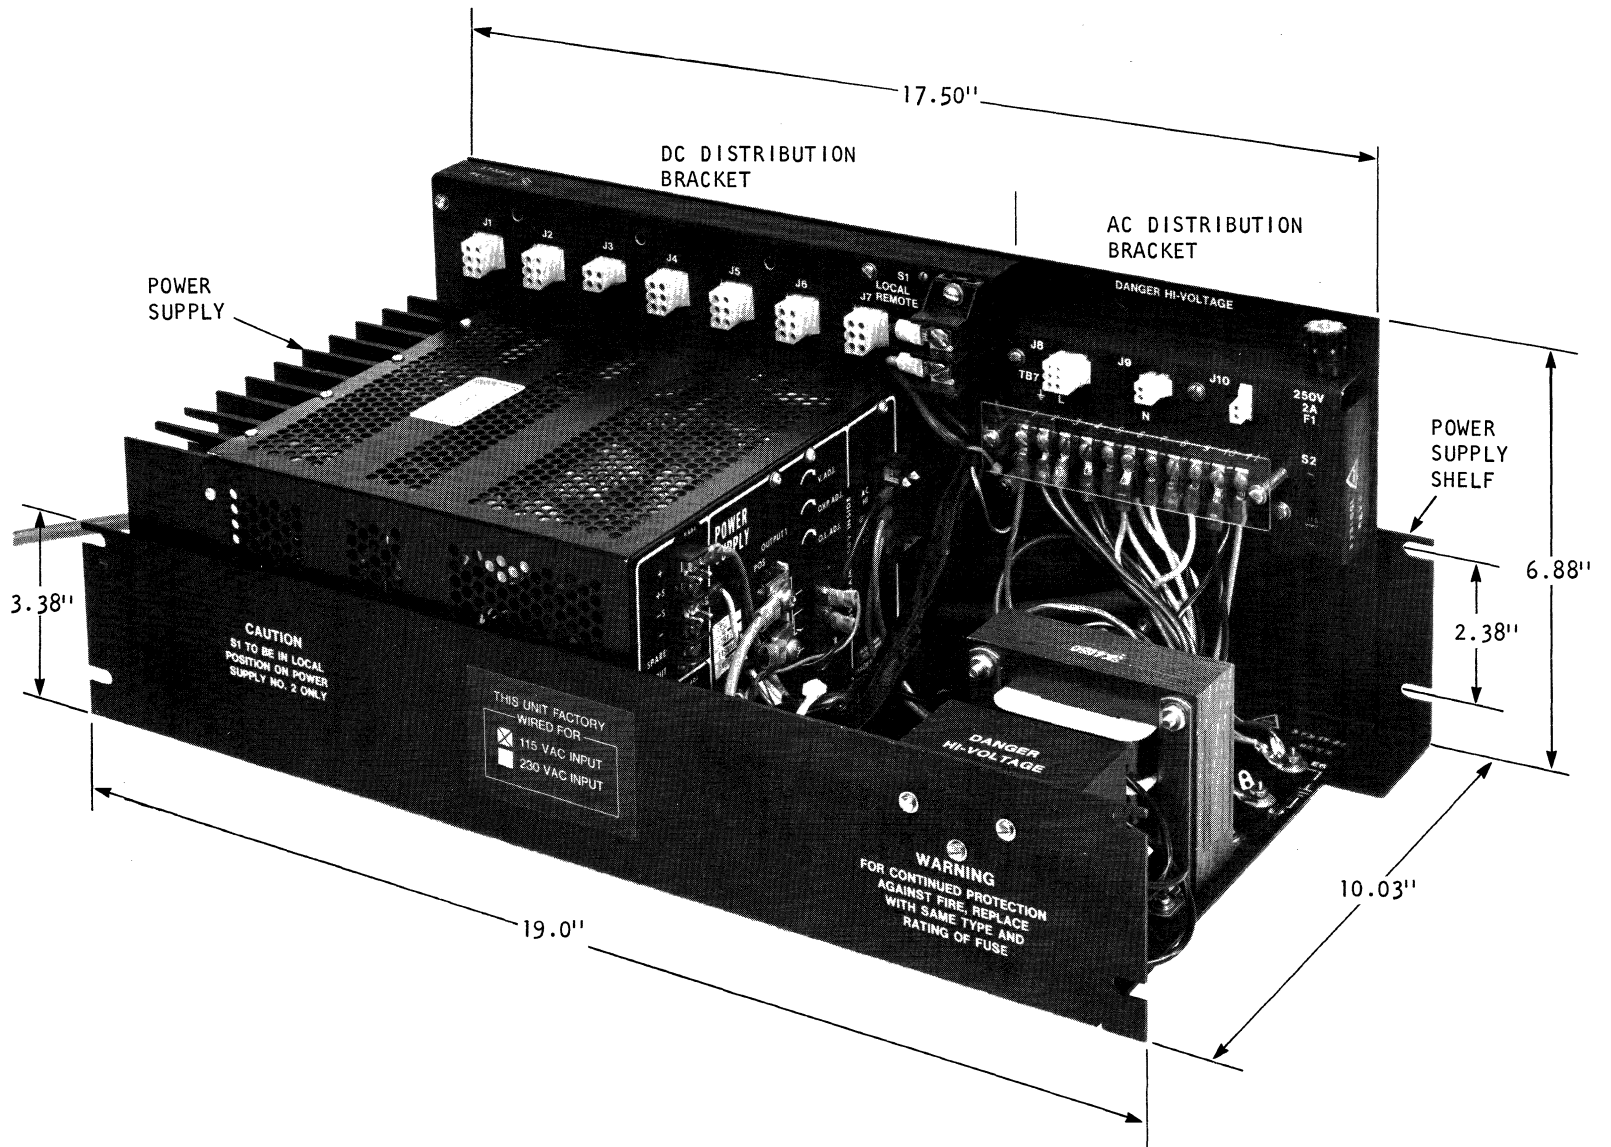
6030/6040 Series INP's External Power Supply Assembly
